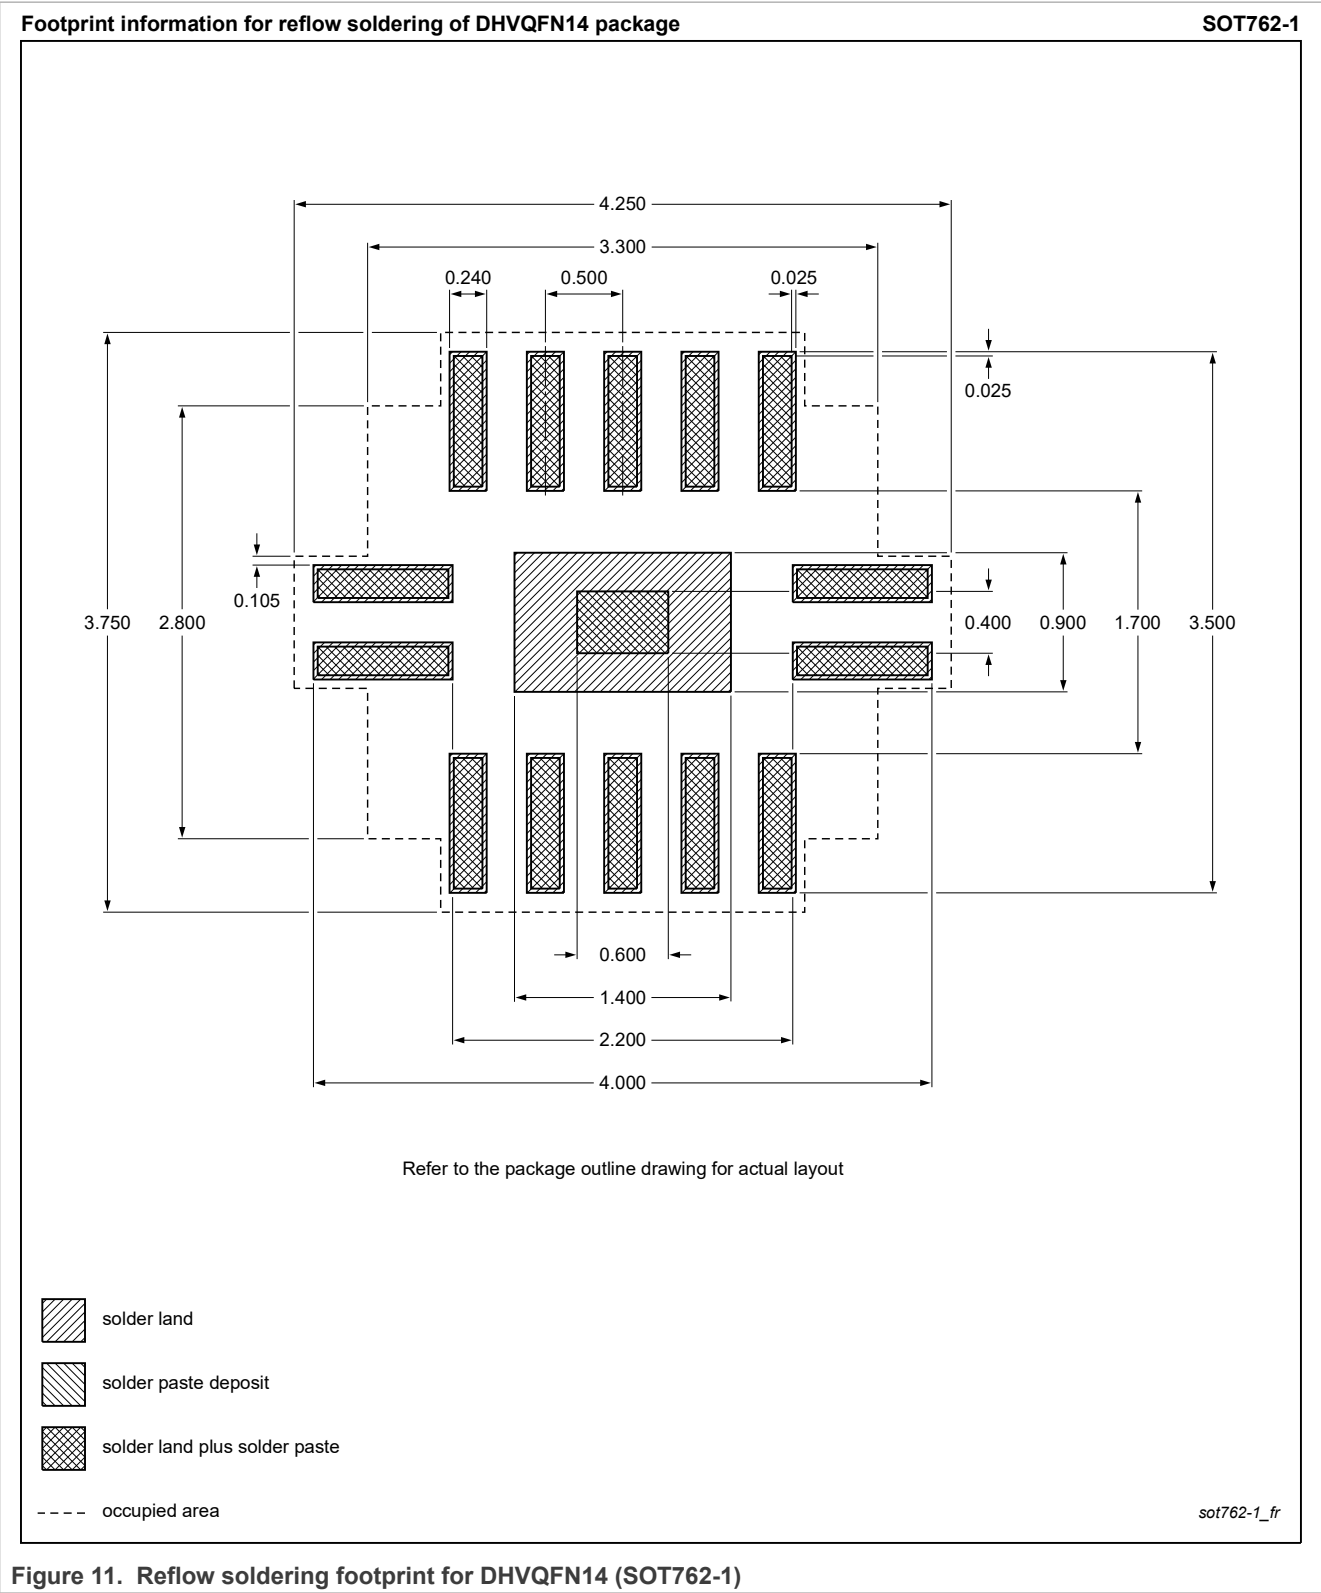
Reflow soldering footprint for DHVQFN14 (SOT762-1)
